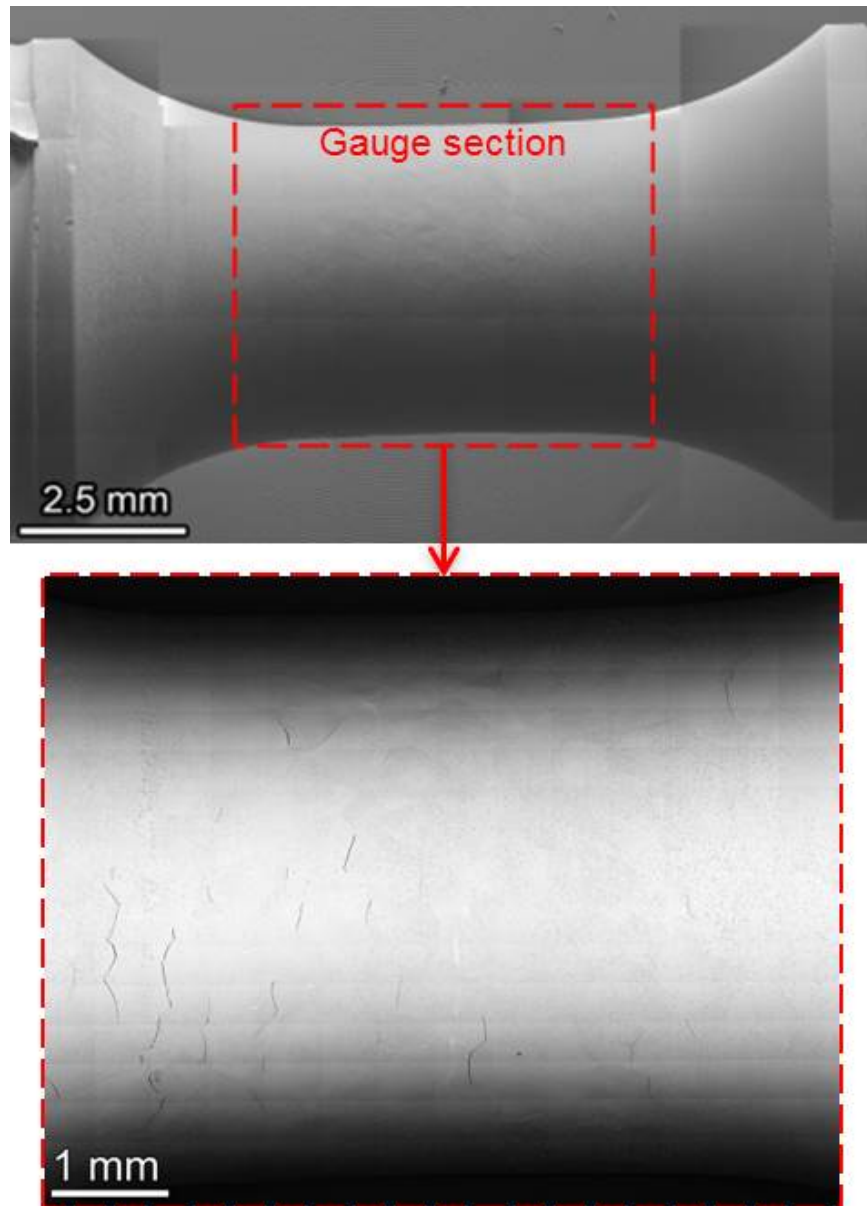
SEM-SE (upper) and BSE (lower) montage images showing IG cracks on the gauge section of a 1 μm finish CRDM specimen (IN048).
